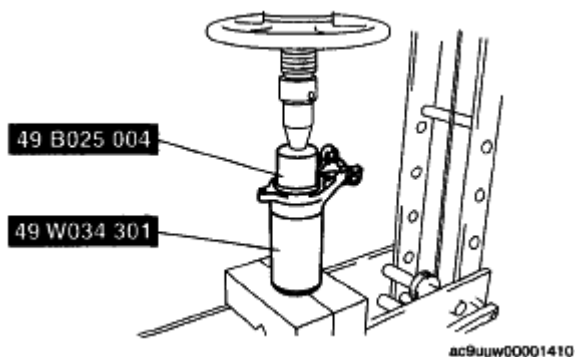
Pressing Dust Seal (Differential Side) With SST
